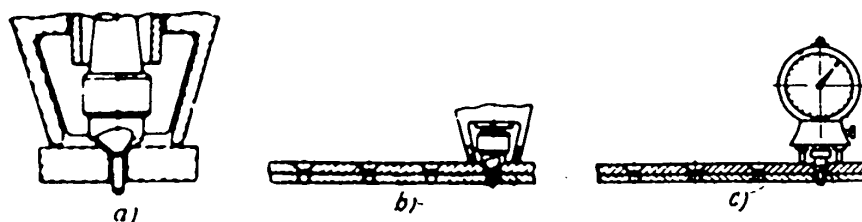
Sequence for Adjusting and Checking Countersinking Attachments
